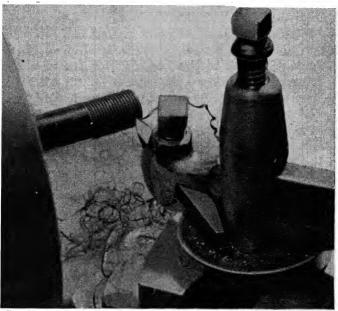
Cutting 24 threads per inch on a ½-inch hard-rubber rod with a single-point lathe tool. In this case, a clean-cut thread was produced by using a tool ground with side rake and feeding it by moving the compound rest that was set at the thread angle.
